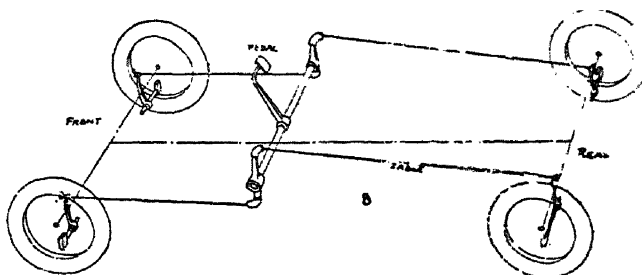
Simple Four-Wheel Braking Arrangement.
